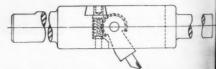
Boring bar in which segmental worm wind and tool holder is used.
